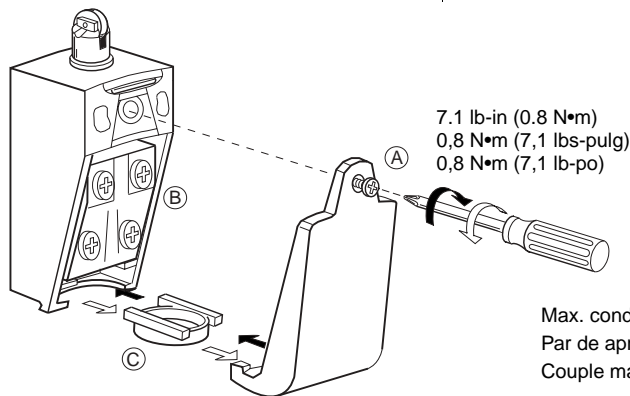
Conduit Adapter Installation / Instalación del adaptador de tubo conduit / Installation de l'adaptateur pour conduit
